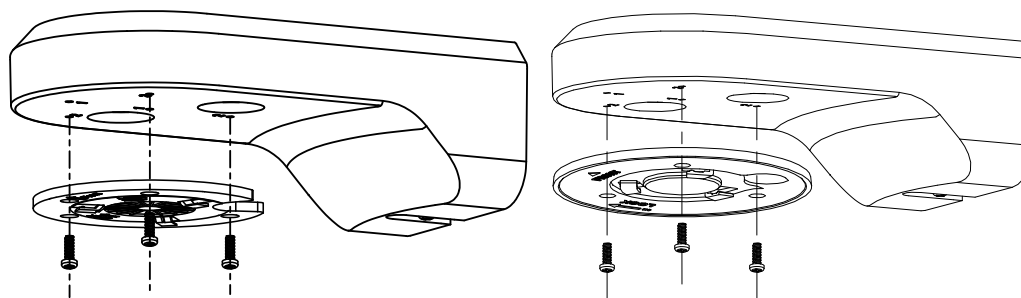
Install the Base Plate – 2.5-inch/2.5-inch IR PTZ Camera
